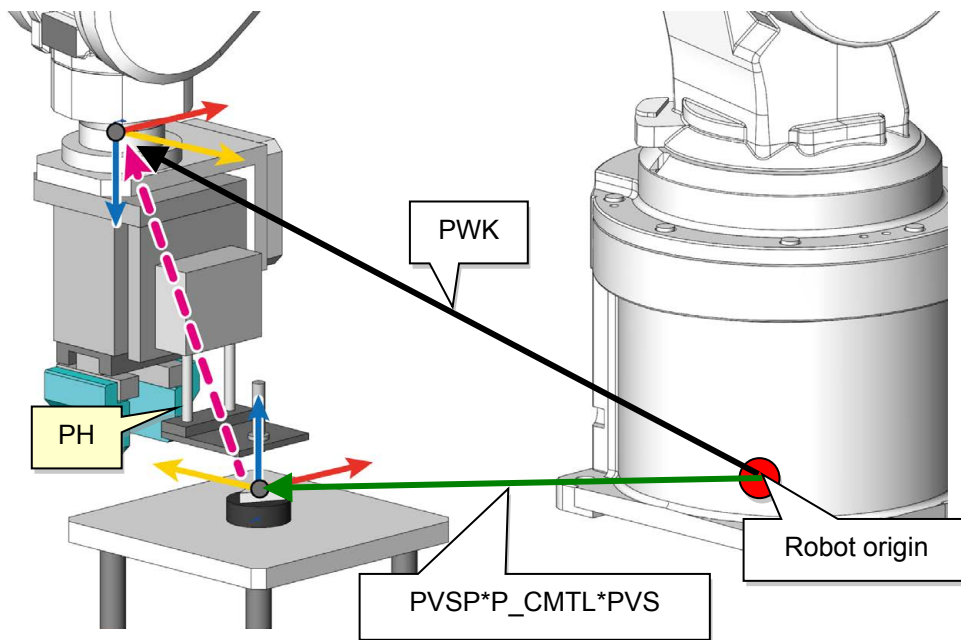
Suction area on the master workpiece (PWK) and master workpiece position (PVS)
